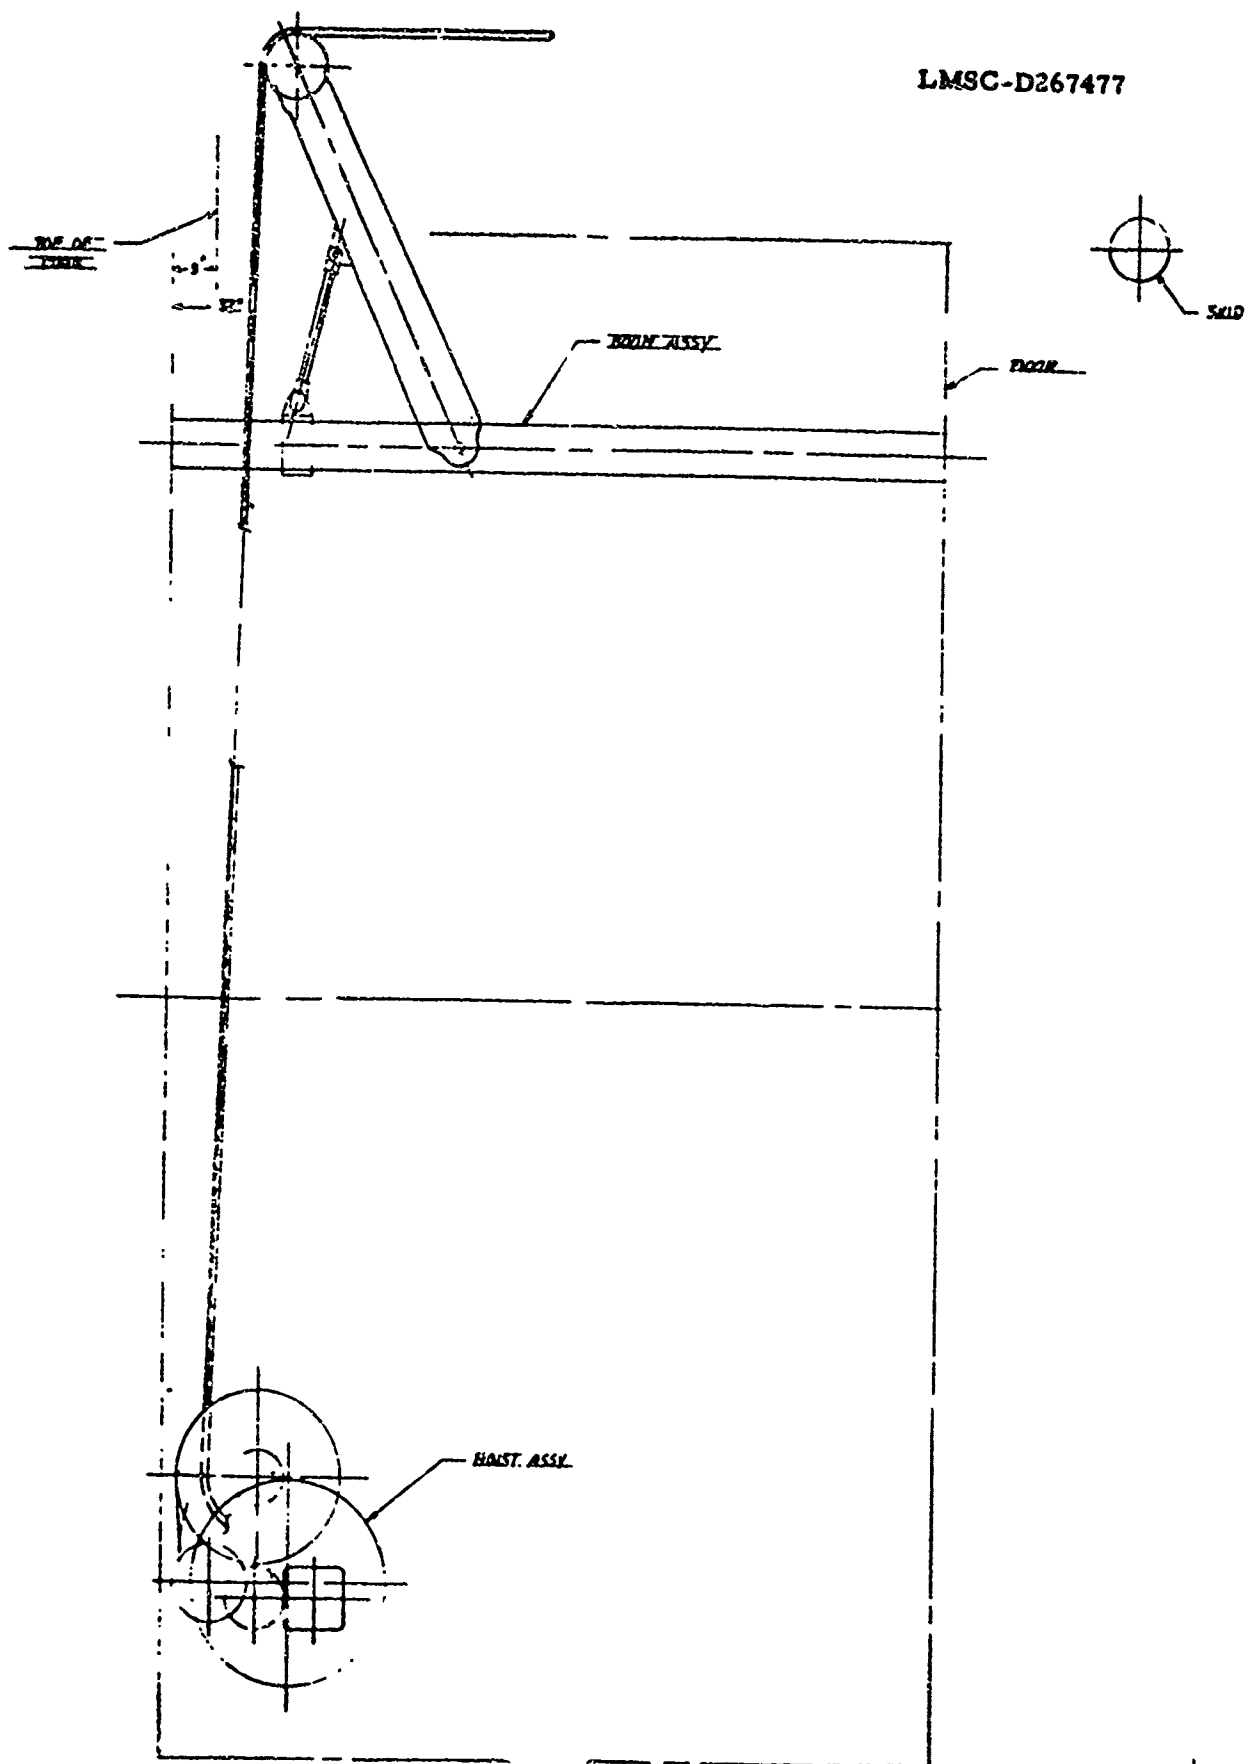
Preliminary Layout - Separate Hoist and Boom Assembly
